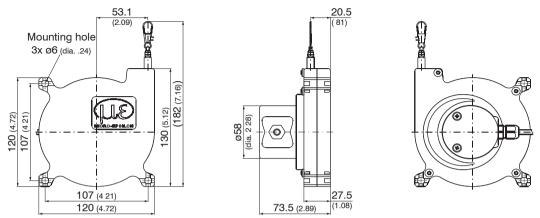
Dimensional drawing WPS-...-MK120-CR, measuring ranges 3000 and 5000 mm, dimensions in mm (inches), not to scale
